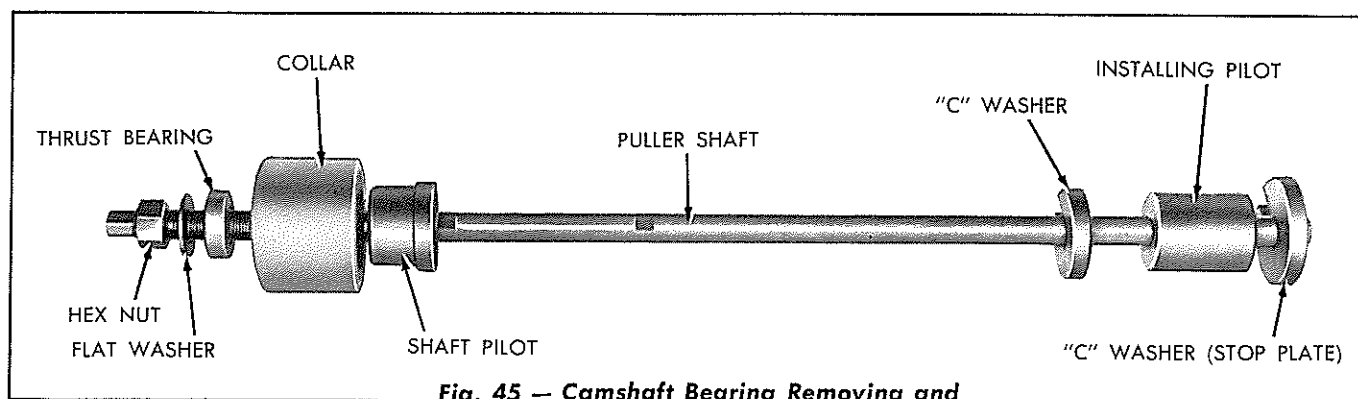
Camshaft Bearing Removing and Installing Tool Set
